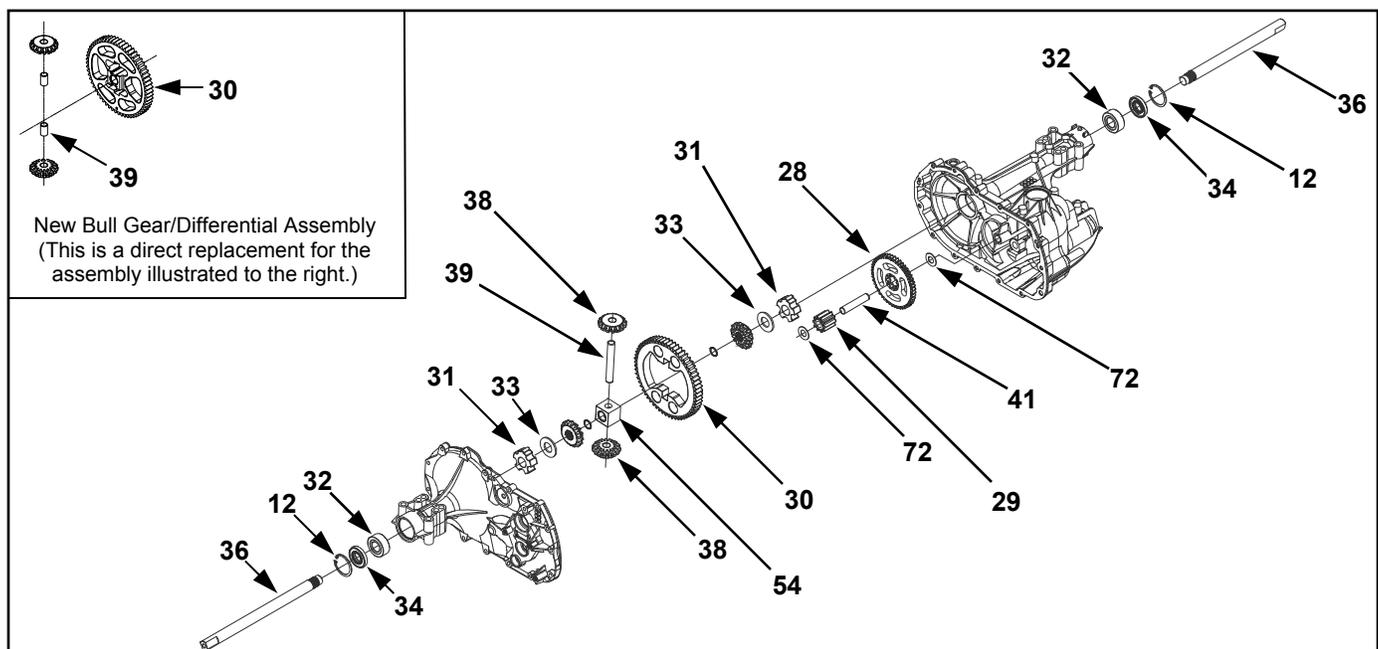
Axle Shaft, Differential & Reduction Gears (earlier bull gear shown)
